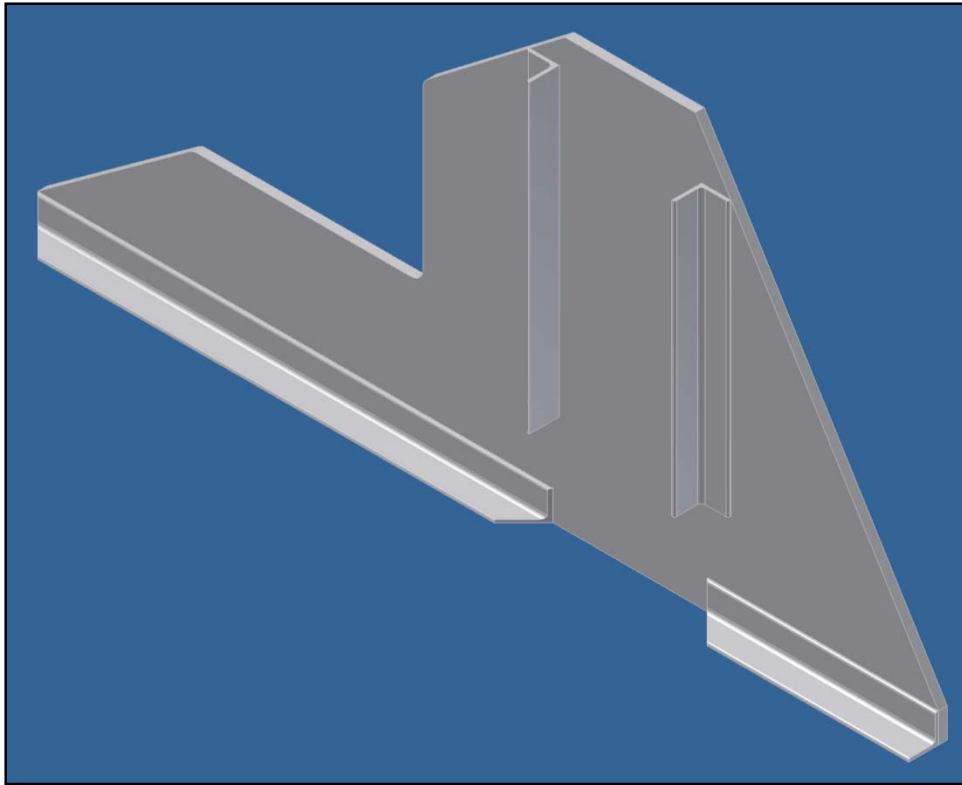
Side Gusset with Angle Iron Sections for Bolted Connections
